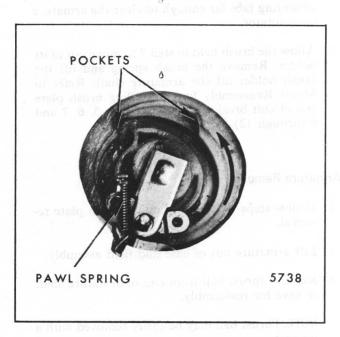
Drive and Lock Pawl Guide Pin Pockets
